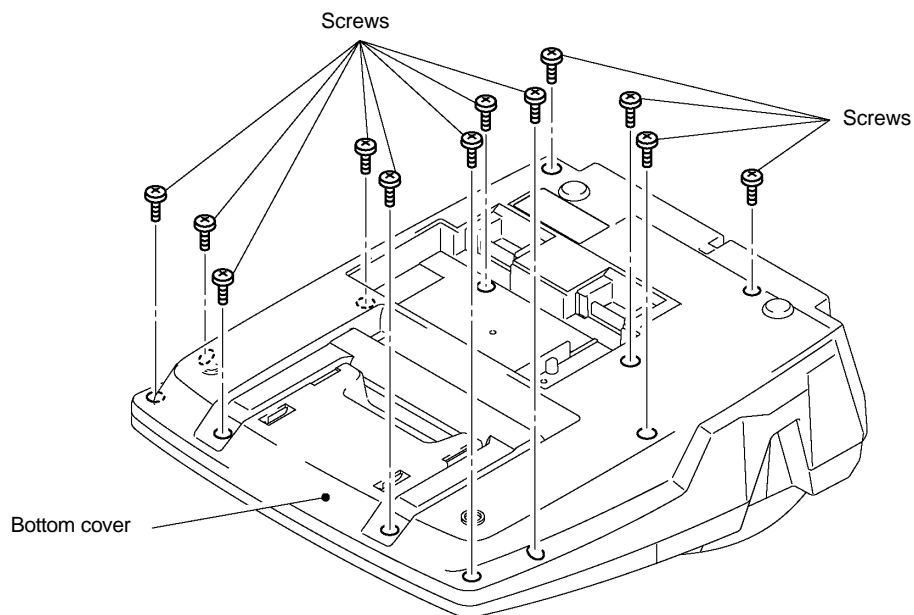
Removing the Screw from Bottom Cover (2)
